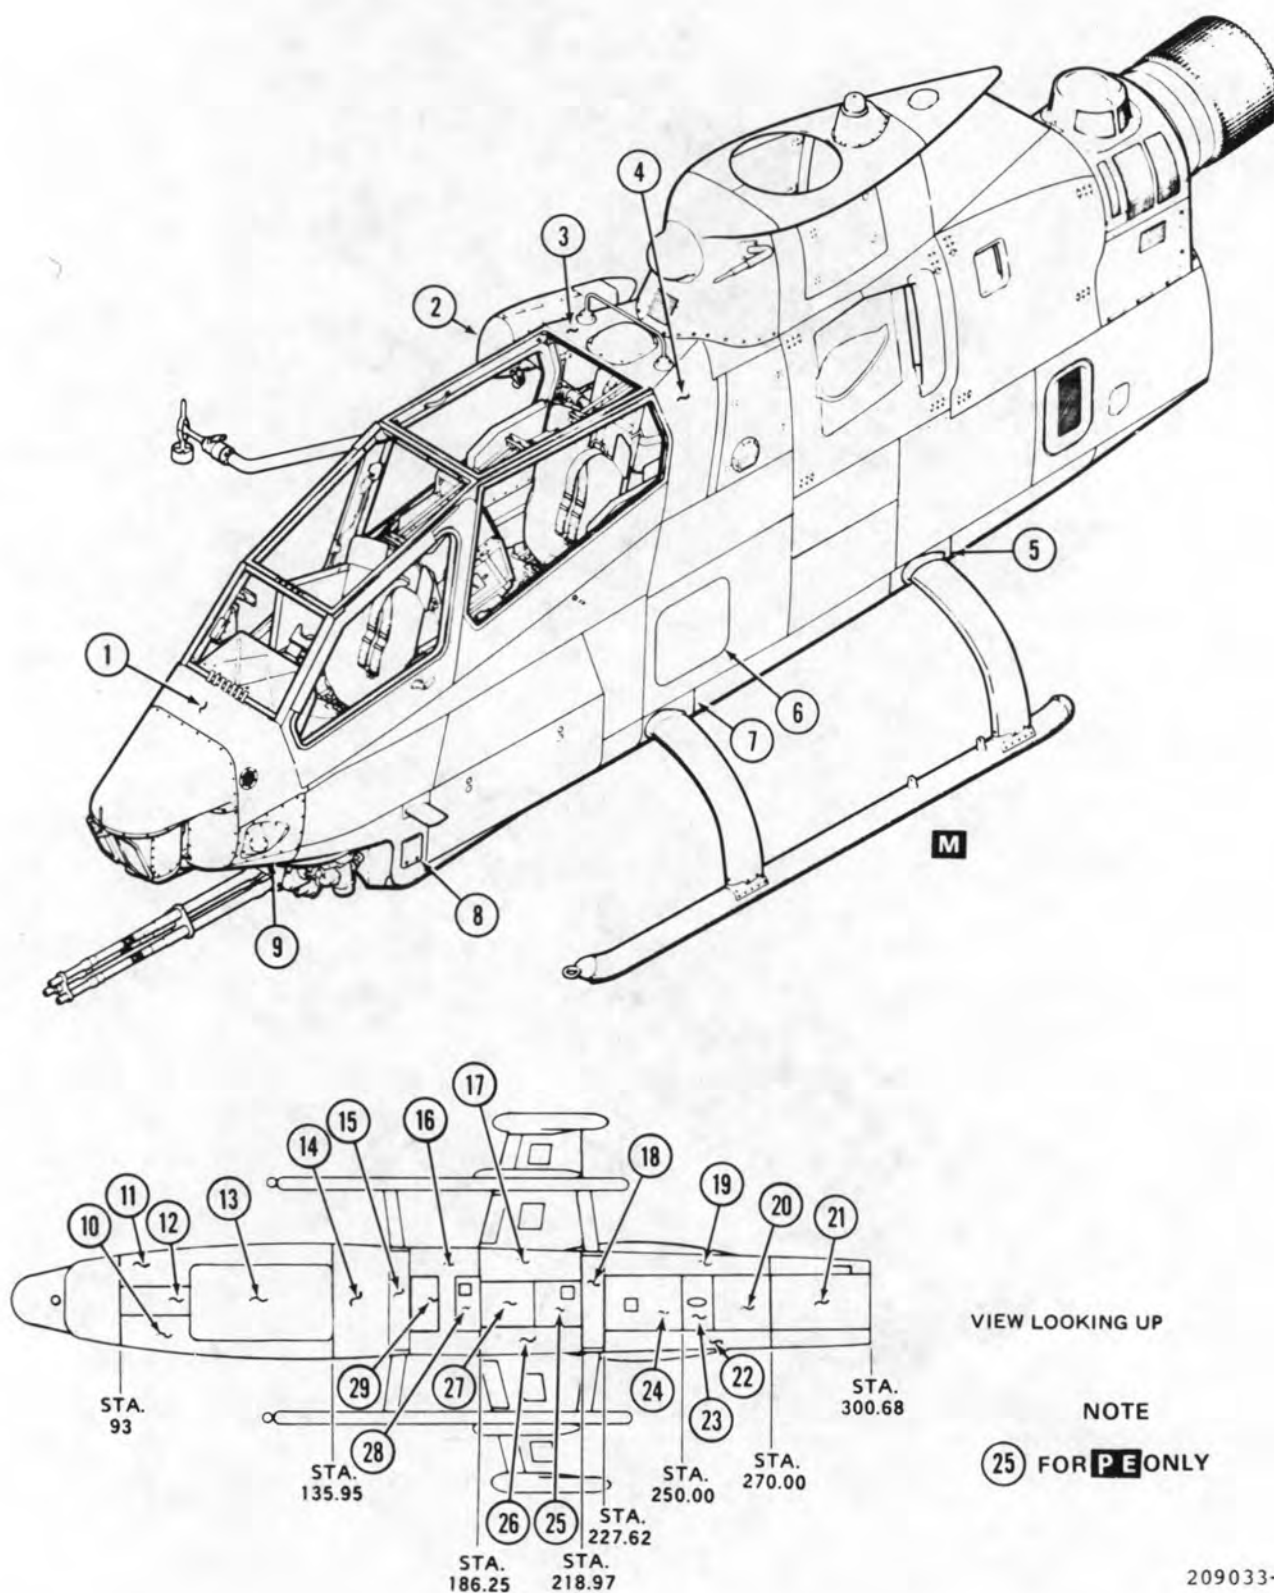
Sheet Metal Panels and Skin (Sheet 2 of 4)
